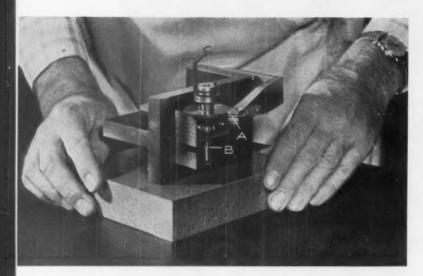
To inspect the gear, the fixture includes an indexing device and an adjustable mirror.
